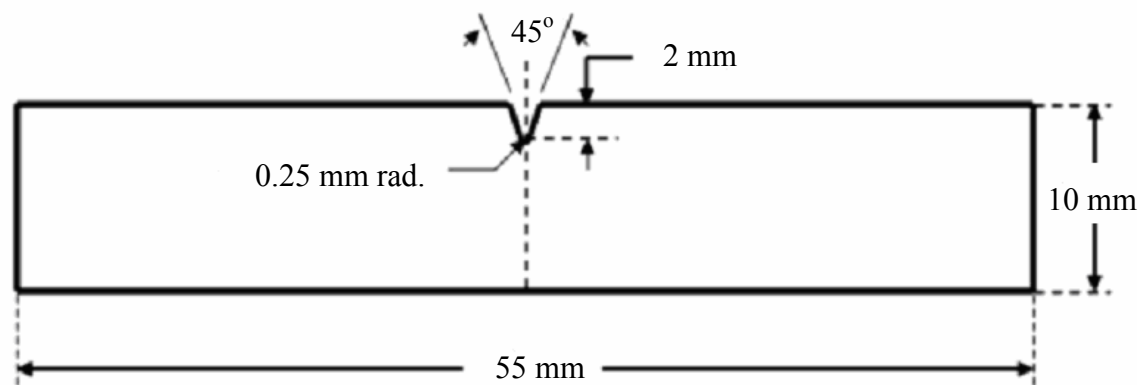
Sketch of a Charpy (single-beam) impact test specimen.
